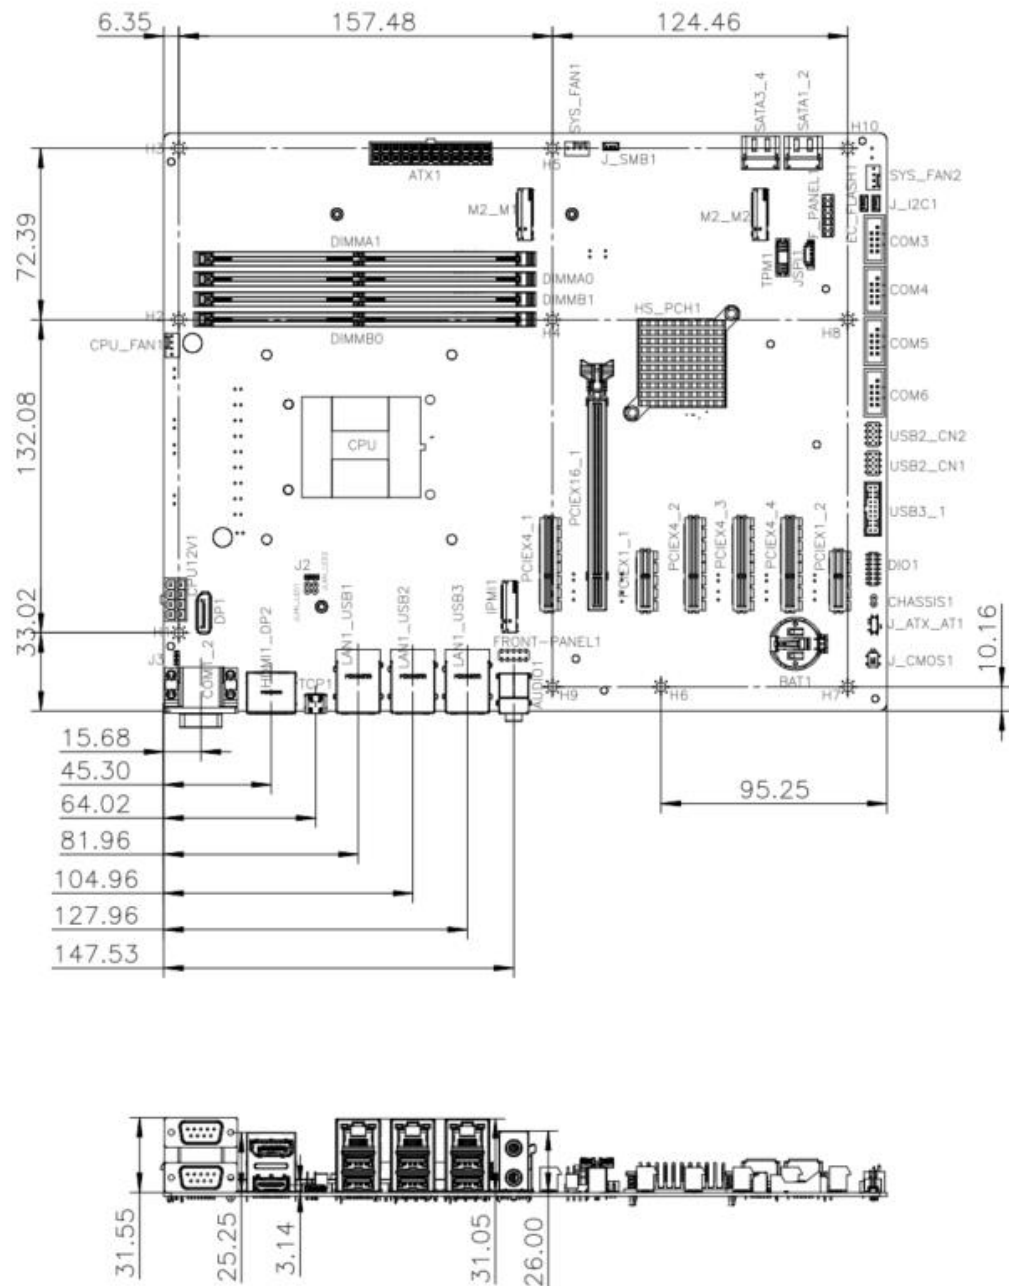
IMBA-ARL-W880 Dimensions (mm)
